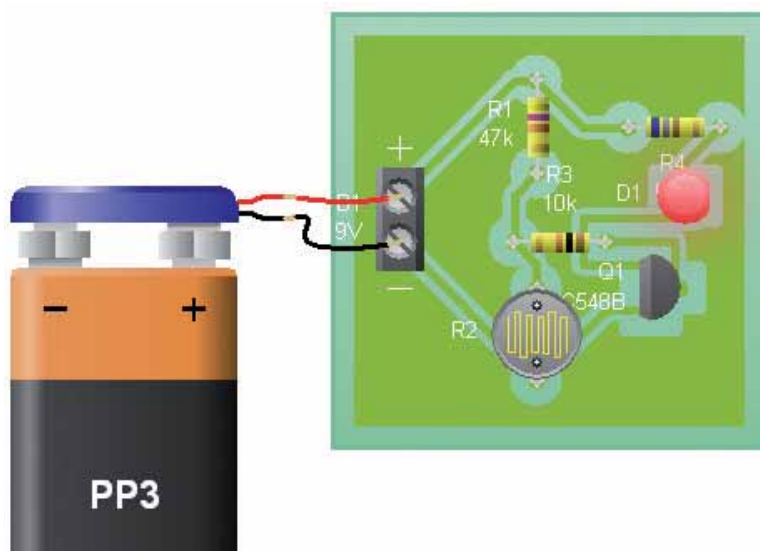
Example PCB layout for the simple light-operated switch circuit in Fig.10.11, and wiring the PP3 9V battery to the PCB
